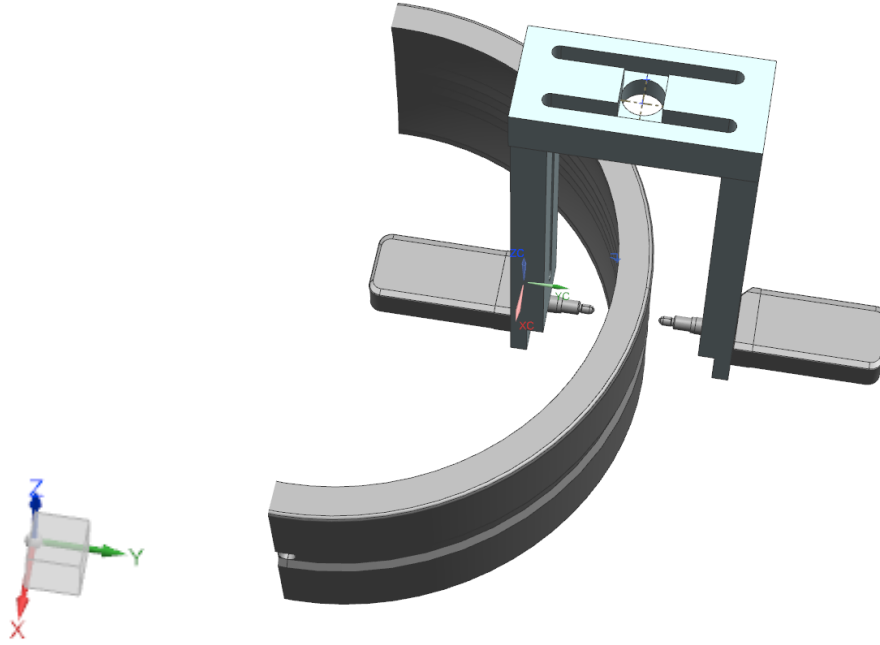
Measurement head and bearing element (cut) with coordinate system
